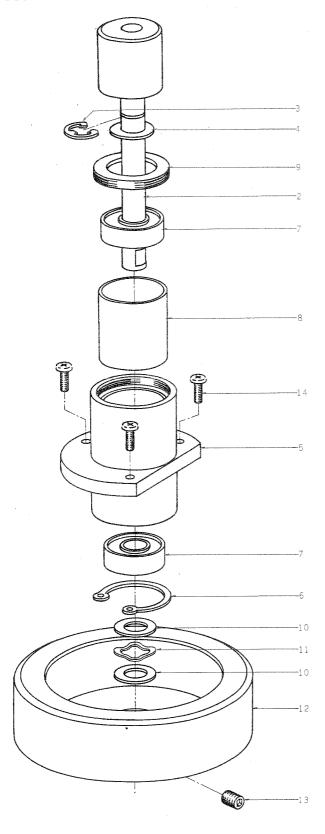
ILLUSTRATION OF REEL MOTOR/REEL TABLE BLOCK
